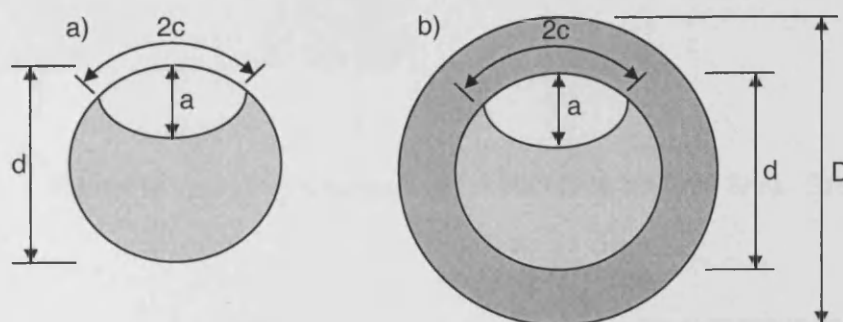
Surface Cracks in Constituent Rod Geometries a) Unstiffened b) Stiffened
